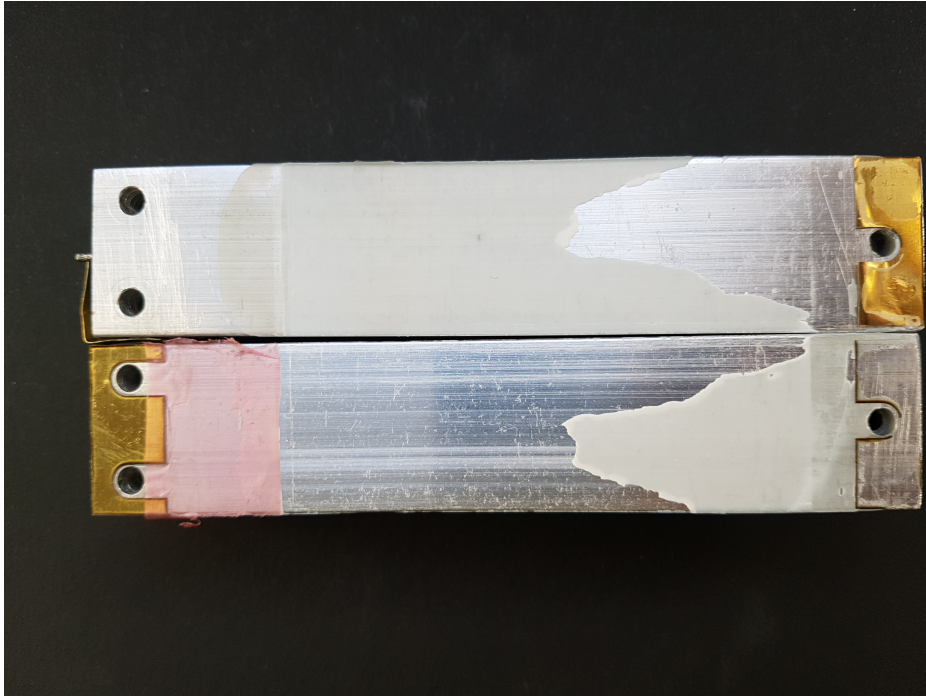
Fracture surface of a fatigue tested T-joint ($ED=0.17 \text{ J/mm}^2$ and $H=50 \text{ }\mu\text{m}$) [158]
